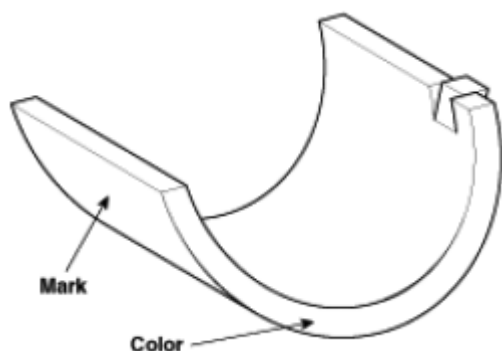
Identifying Identification Mark (Connecting Rod Bearing)
